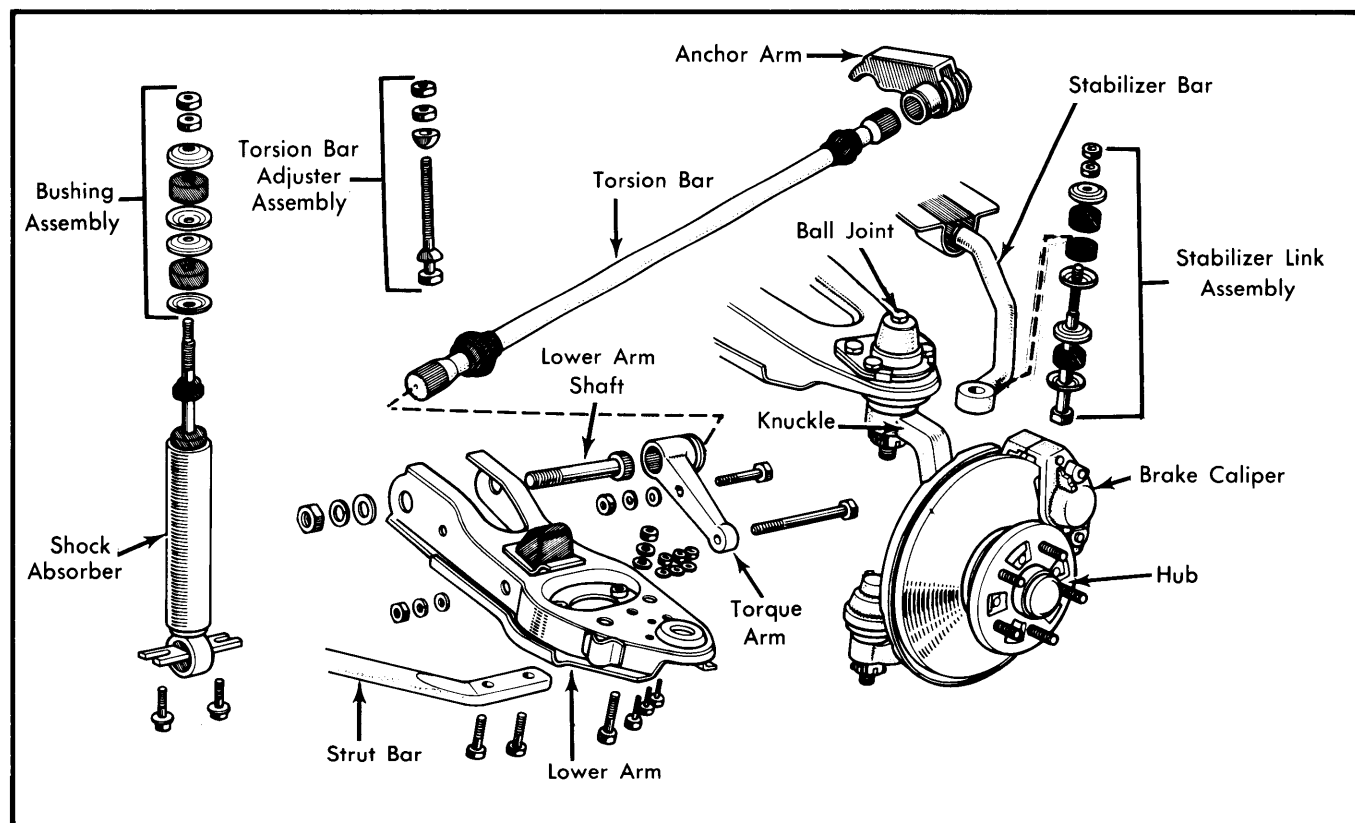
Exploded View of Toyota Pickup Front Suspension
